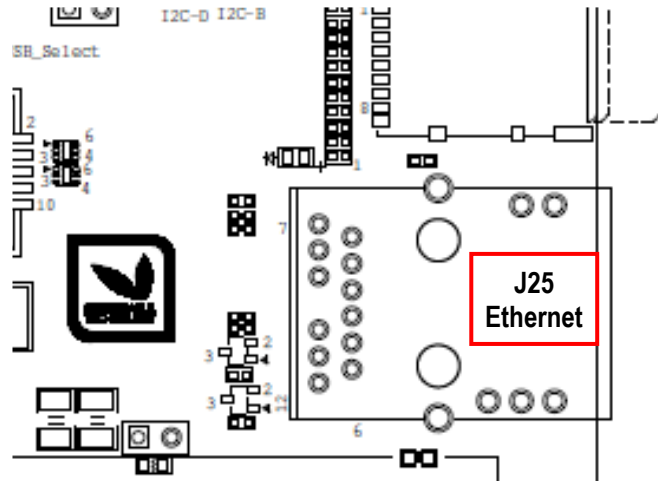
uCOM Carrier Board, Ethernet Interface Connector
